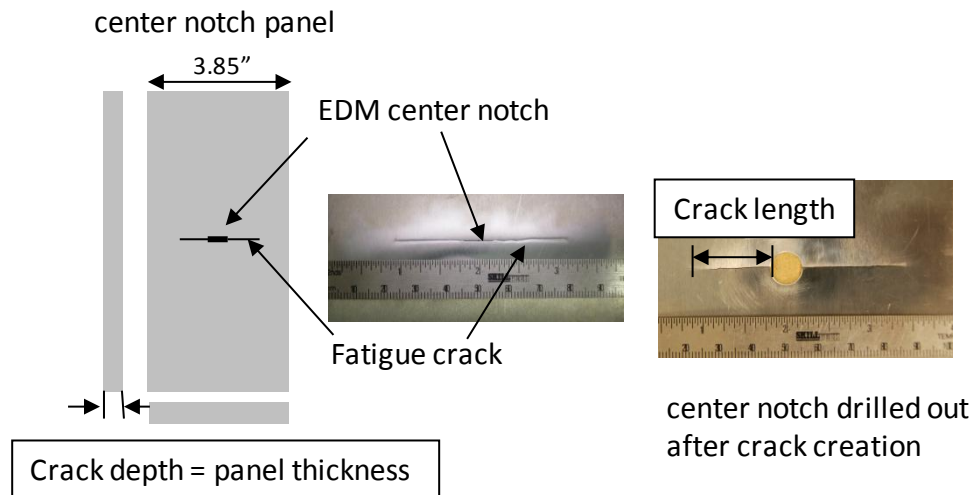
Fatigue Crack Specimen Design and Relevant Dimensions
